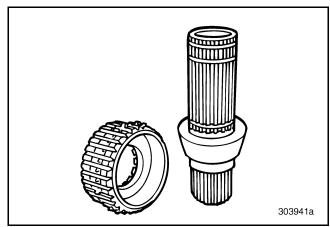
Removing Lo-Range Gear Hub from Rear Mainshaft (T313L/T318L Shown)
